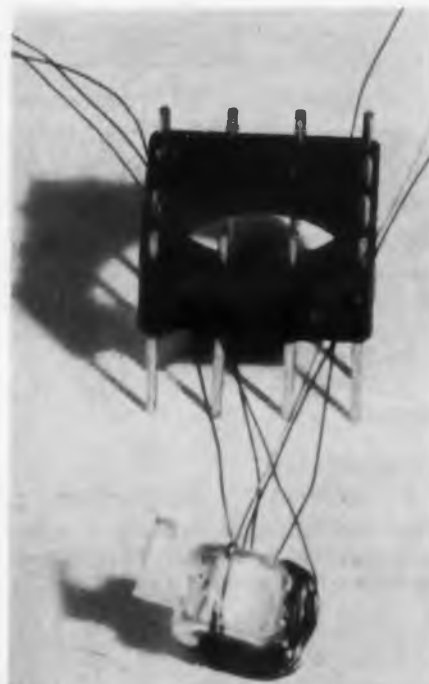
Hook-like arm holds tape-wound core while leads are being soldered to PMS header.
